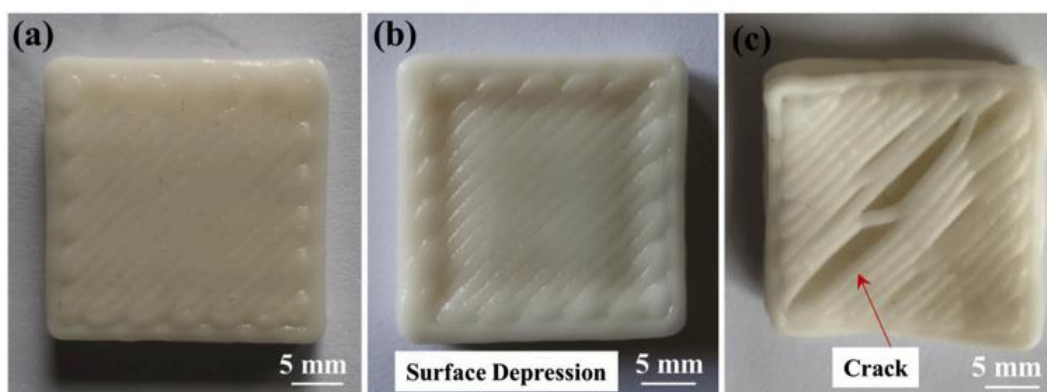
Photos of the dried samples: (a) without defects (b) surface depression (c) cracks along the printing path.
